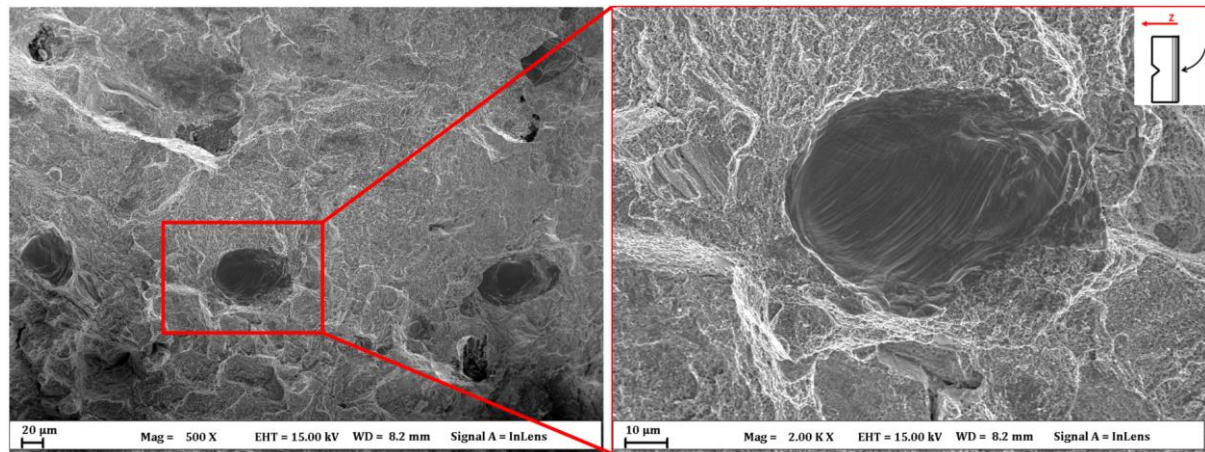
Fracture surfaces of the 316L stainless steel impact specimen produced with the nitrogen generator.
